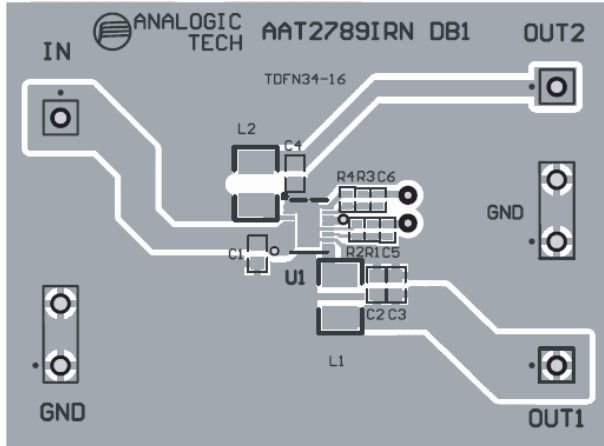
AAT2789 Evaluation Board Component Side Layout.
